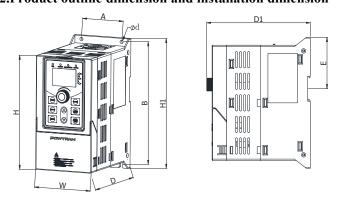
Outline drawing and installation hole size of 15kw G3 and above products 7-1-2.Product outline dimension and installation dimension
